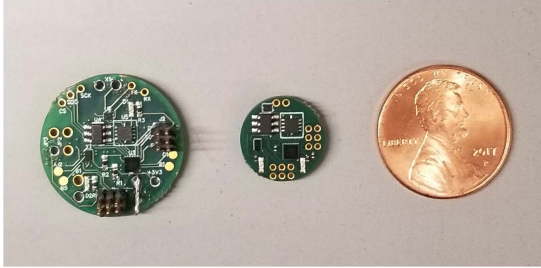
(From left to right) 2 cm Diameter PCB, 1 cm Diameter PCB, US Penny.
